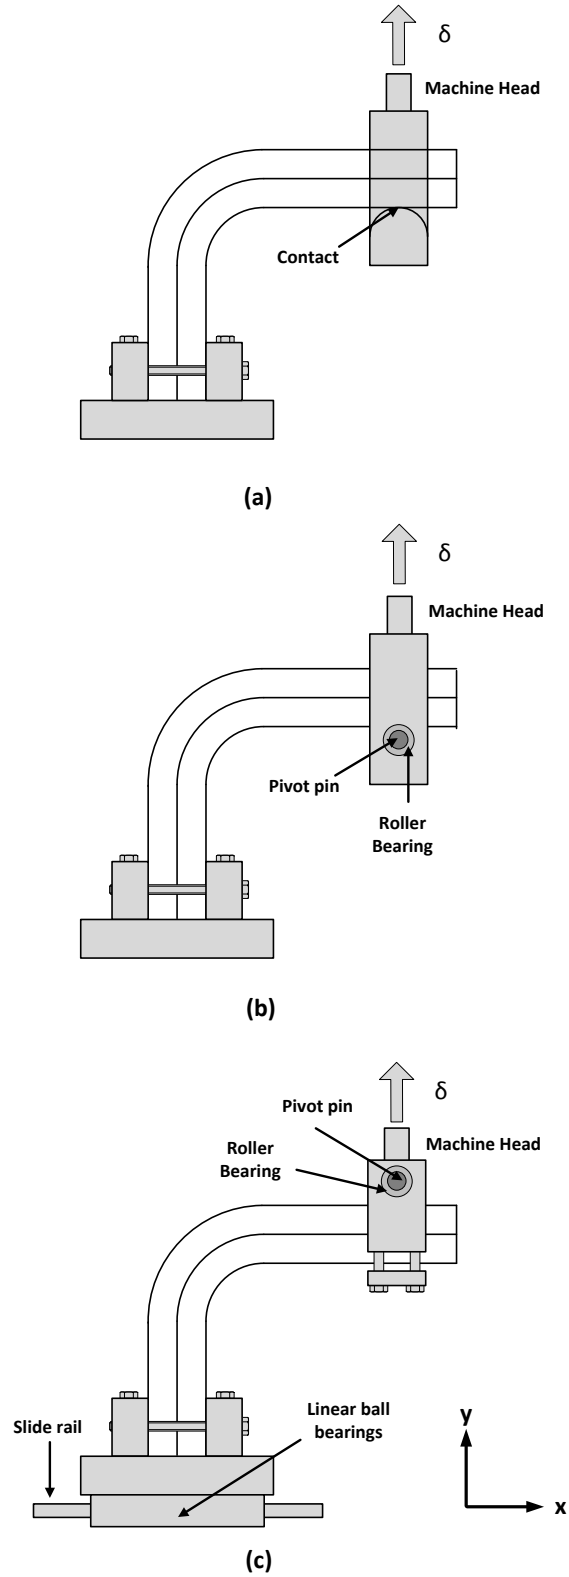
Proposed and used loading fixtures to simulate the loading perpendicular to the upper arm of the L-shaped specimens, (a) Fixture #1, (b) Fixture #2, (c) Fixture #3.
